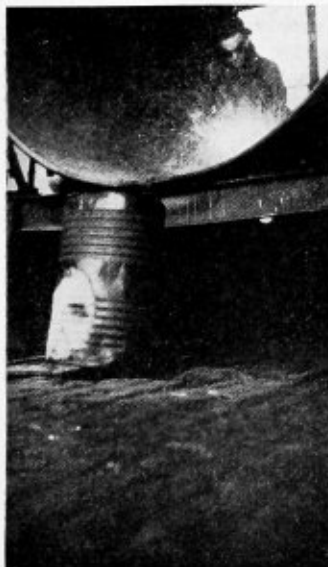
Welding inner V of longitudinal seams. Note method of preheating with oil torch
